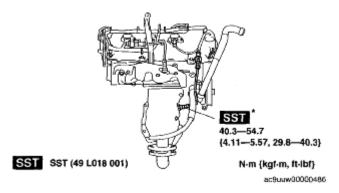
View Of RH HO2S With Torque Specifications Courtesy of MAZDA MOTORS CORP.
